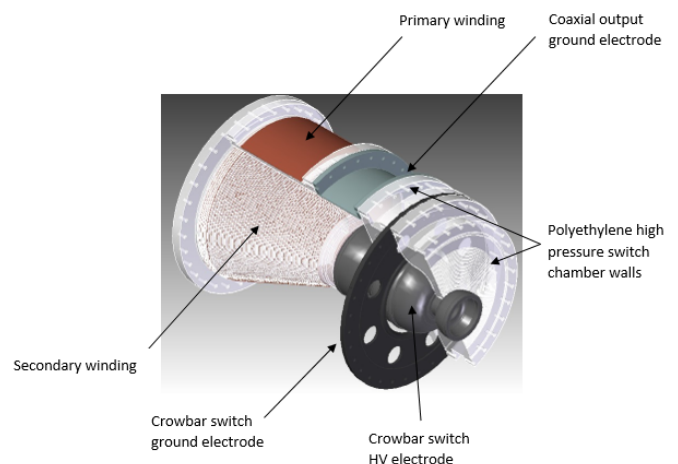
CAD drawing of the MV-class Tesla transformer.
